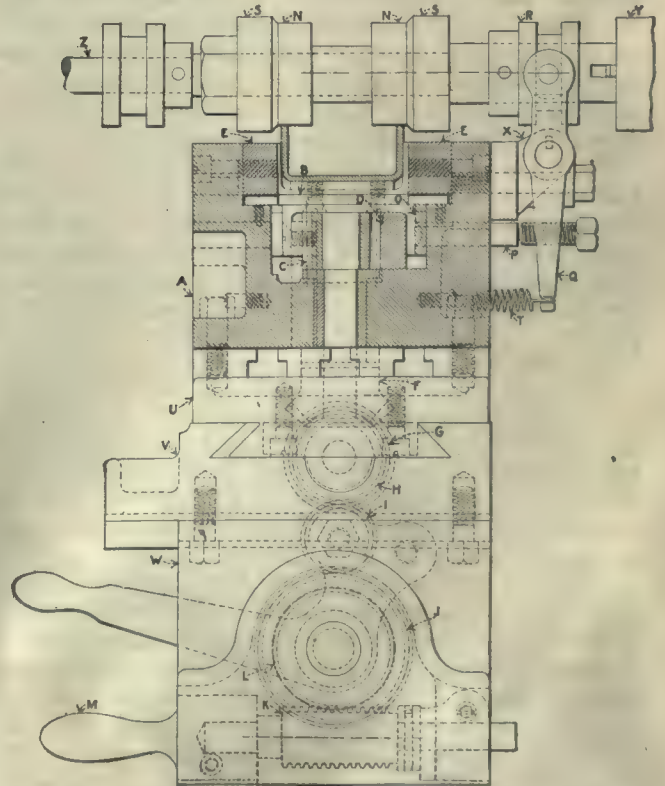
SECTION SHOWING THE FEED MECHANISM OF THE CARRIAGE
